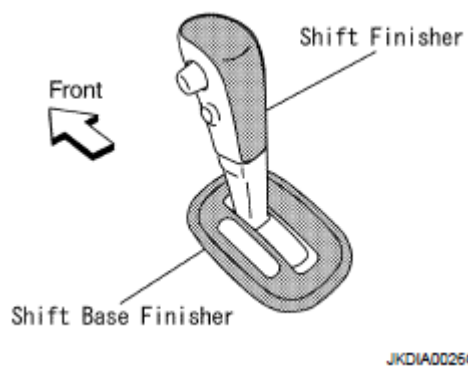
Identifying Shift Finisher And Shift Base Finisher
